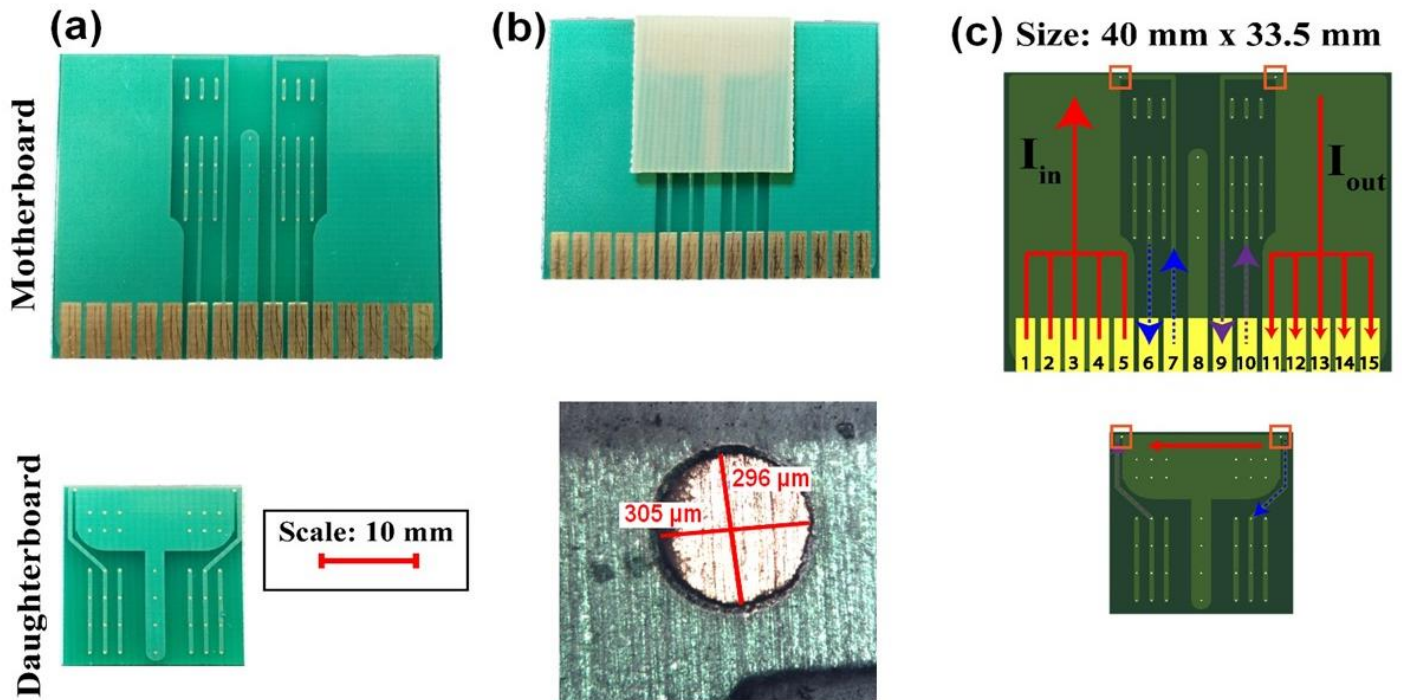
Second variation of test vehicle consisting of motherboard and daughterboard, showing (a) photographs of bonding sides with 42 solder pads each board, (b) assembly with daughterboard flipped onto motherboard and a close-up of an example solder pad, and (c) layout indicating current direction and voltage probe pads. Current direction is shown in red and voltage drop for left and right solder joints is shown in blue and purple, respectively. Location of current-stressed joints (DUTs) is inside orange squares. Only one of the joints DUT was cross-sectioned before EM testing.
